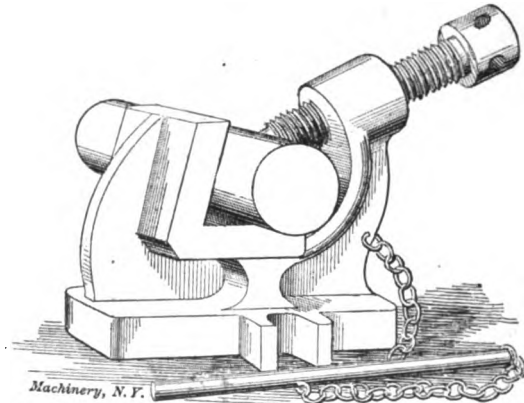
Vise for Holding Shafts for Keyway Milling.
